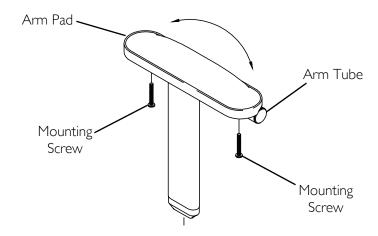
Adjusting the T-Arms - Adjusting T-Arm Width
